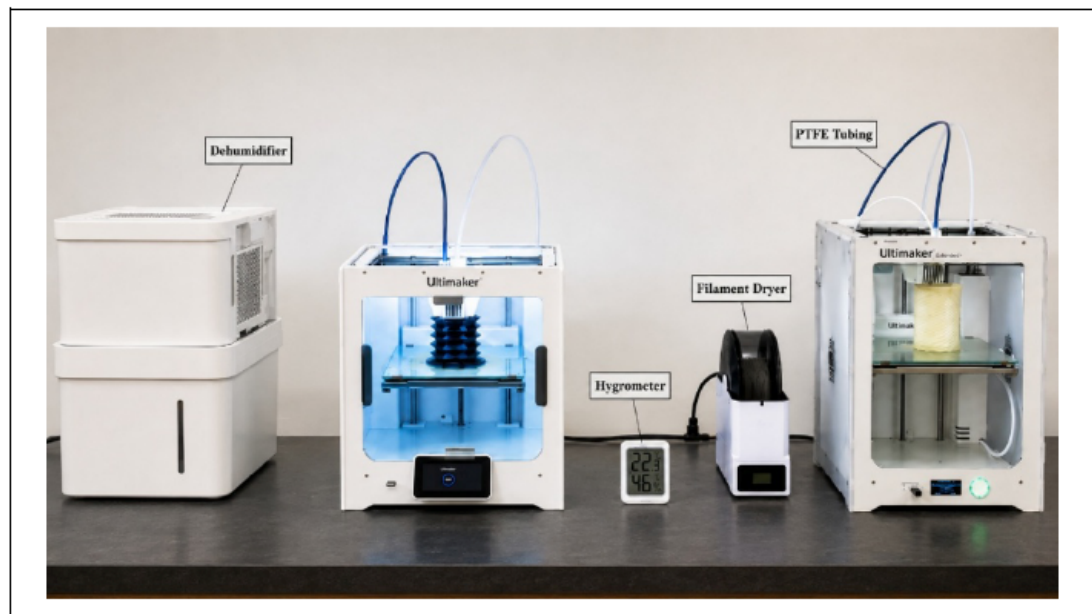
Additive manufacturing and environmental control setup used for soft pneumatic actuator fabrication.
